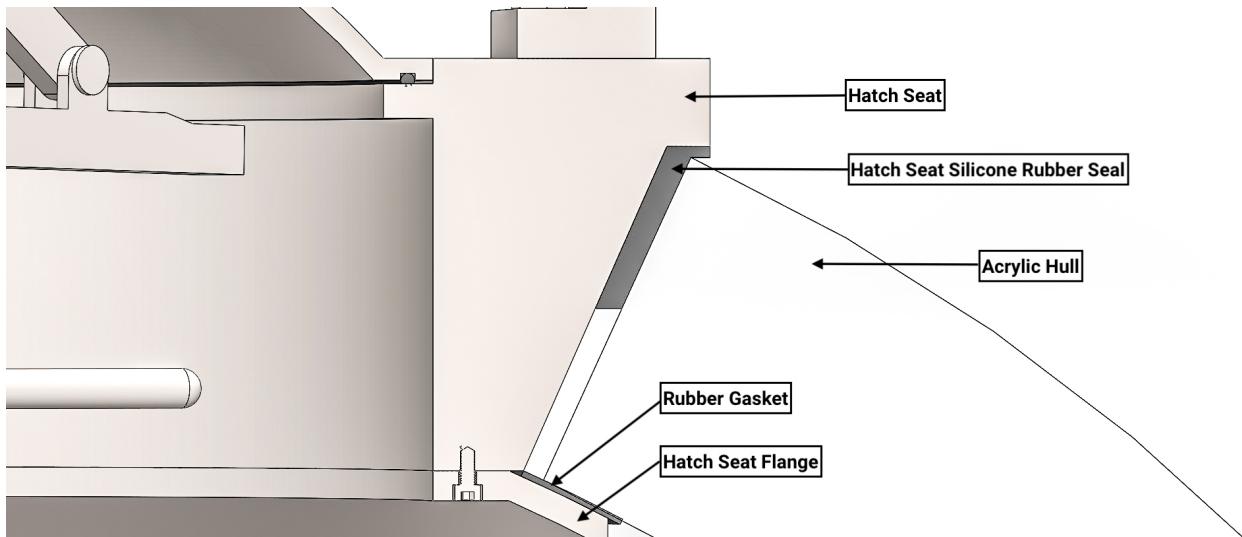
Cross-sectional View of Acrylic Hull to Hatch Seat Connection
